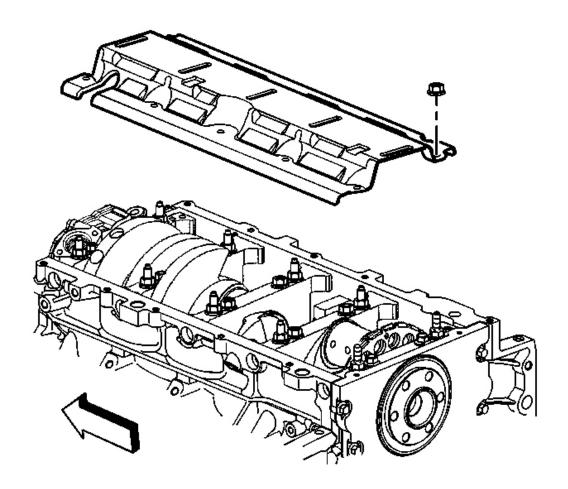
View Of Crankshaft Oil Deflector Courtesy of GENERAL MOTORS CORP.
